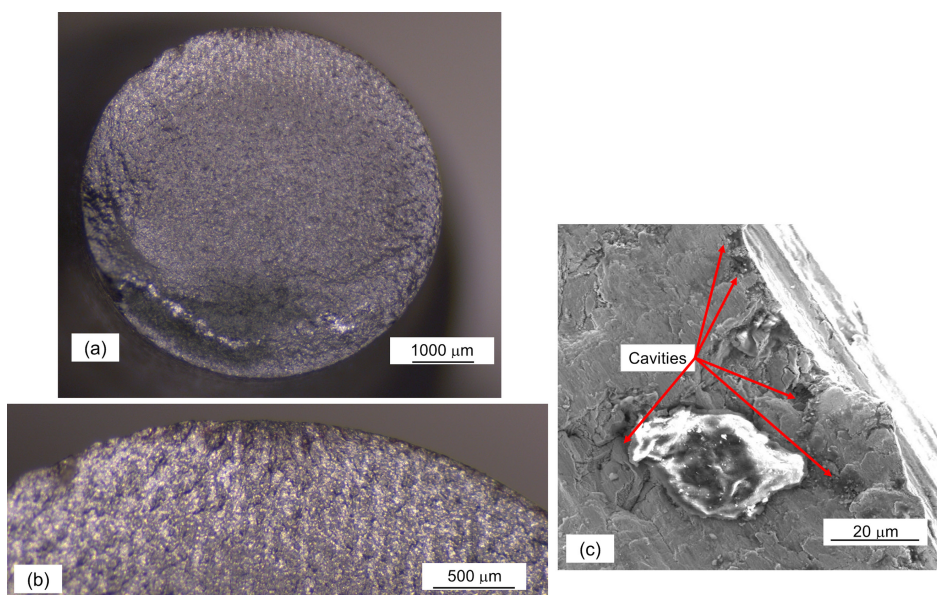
| (a) General view of the fracture of a sample that failed in the additively processed part. (b,c) Details of crack initiation from subsurface defects. [Colour figure can be viewed at [wileyonlinelibrary.com](https://onlinelibrary.wiley.com)]
